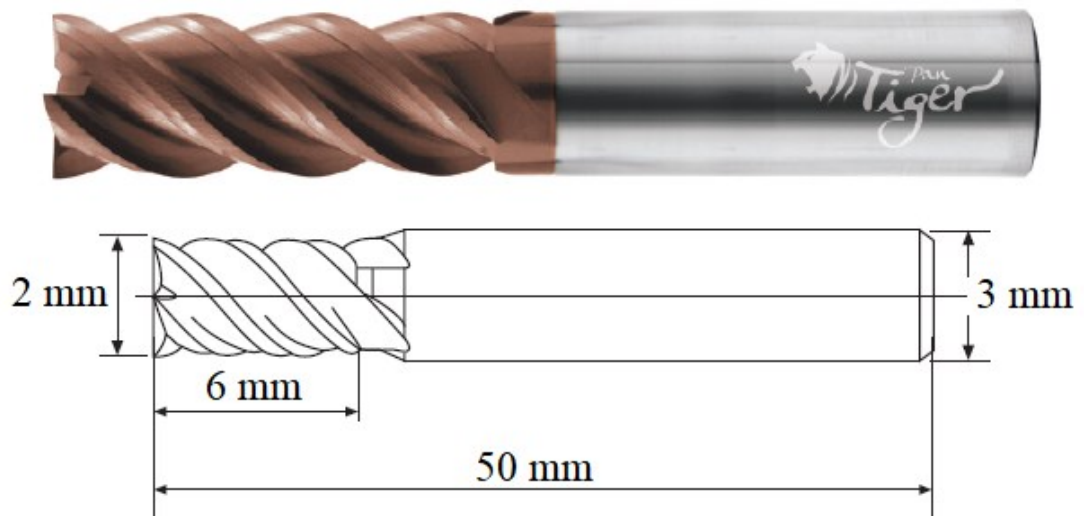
Milling cutter used to slitting. (Adapted from [56]).
